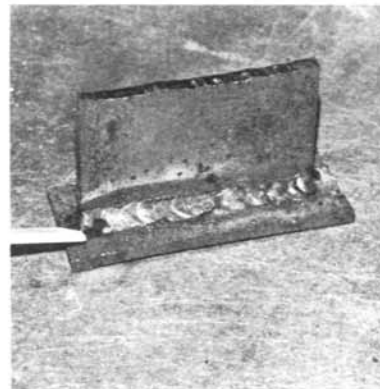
Dark area pointed out in the bead in this picture is a slag inclusion, which can weaken a weld bead.
